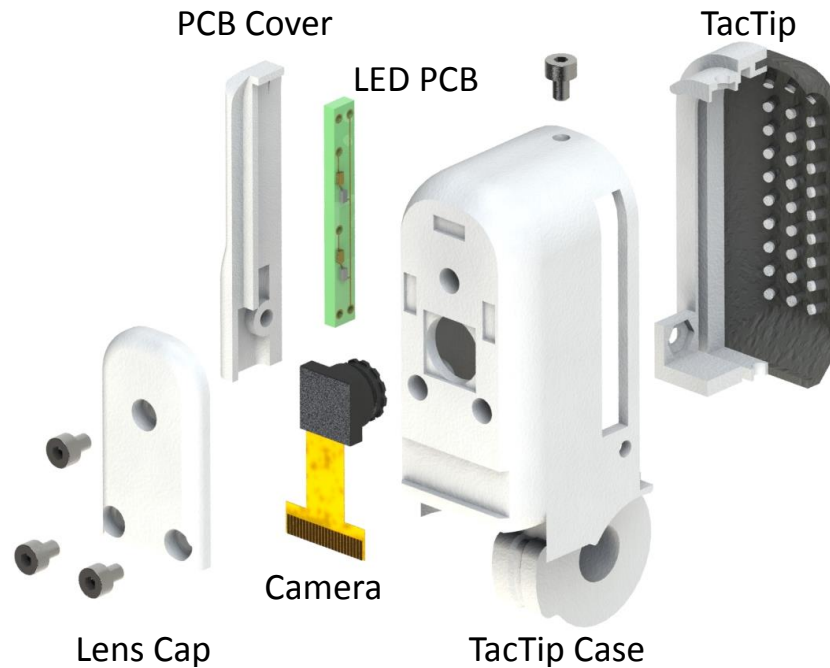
Exploded view of the distal phalanx in the T-MO finger.
